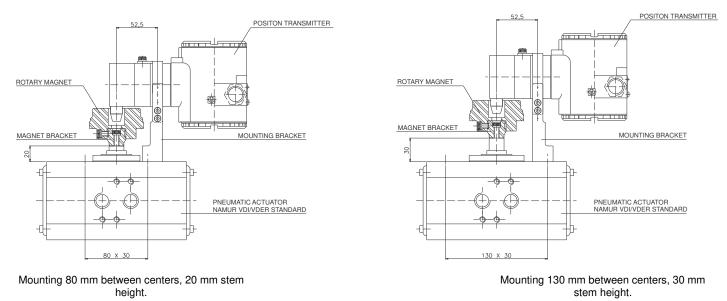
b – Special Mounting Bracket Dimensional Drawing - Rotary VDI / VDE NAMUR
